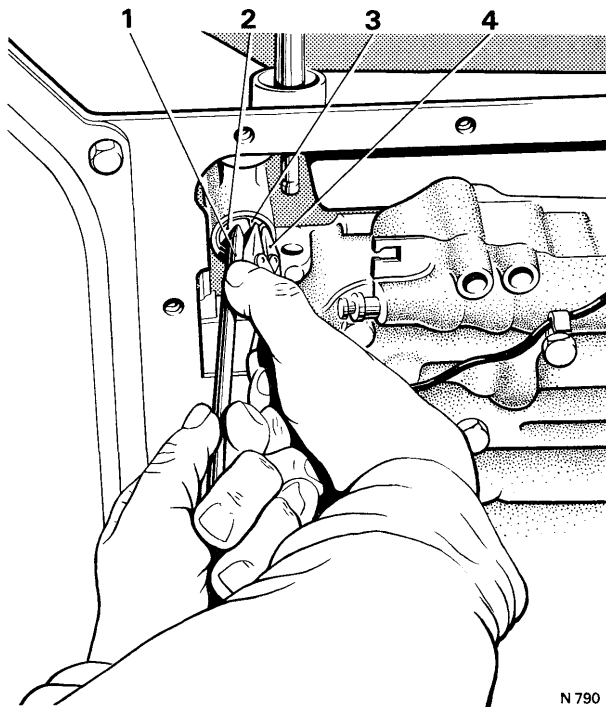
REMOVING THE PRESSURE REGULATOR VALVE
